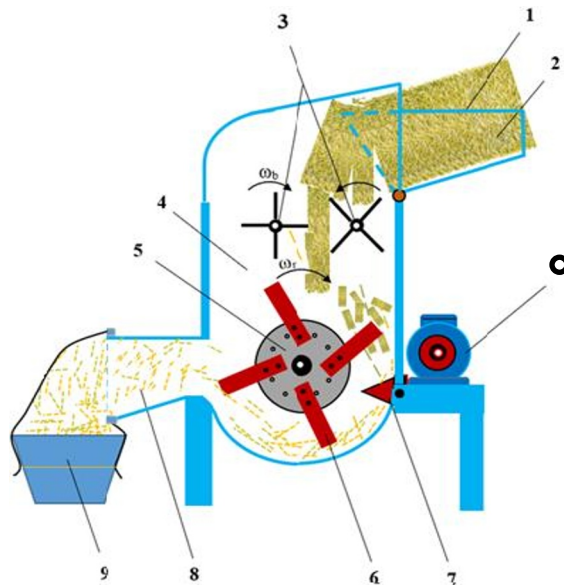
Technological scheme of feed grinding machine: 1 is pressed coarse feed; 2nd transmission line; 3 is standard transmission bits; 4 is grinding chamber; 5 is rotor; 6 is grinding blades; 7 is fixed blades; 8 is product output channel; 9 is food container; 10 is electric motor.
